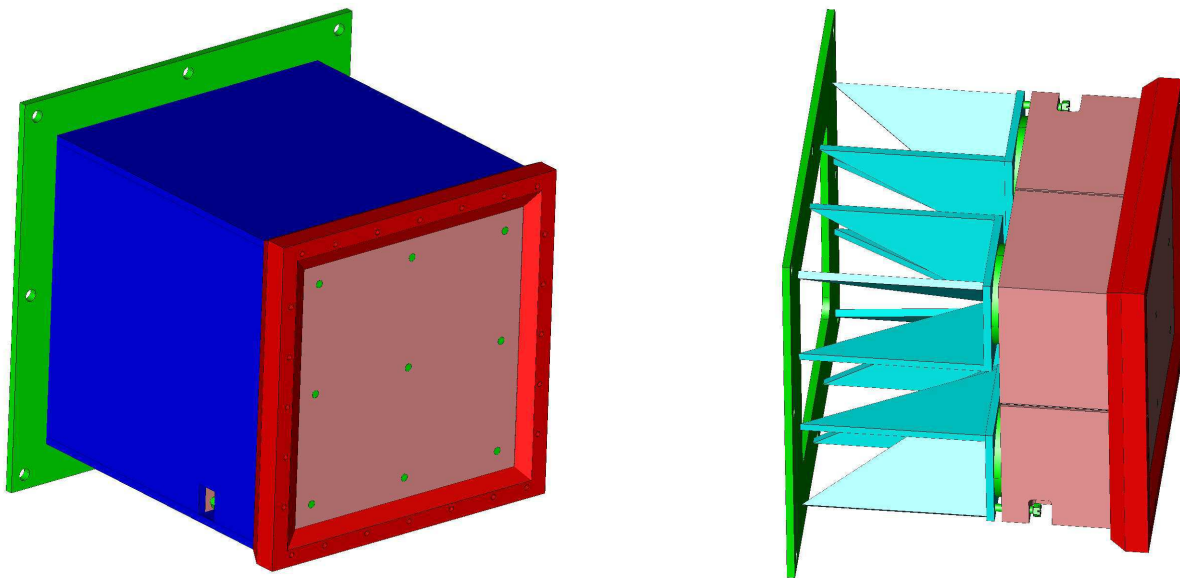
(Left) Impact module oriented horizontally with the impacting surface in the foreground. (Right) Impact module with side plates removed to show internal structures and components. A protective securing plate is visible around the peripheral edge of the impacting surface.
